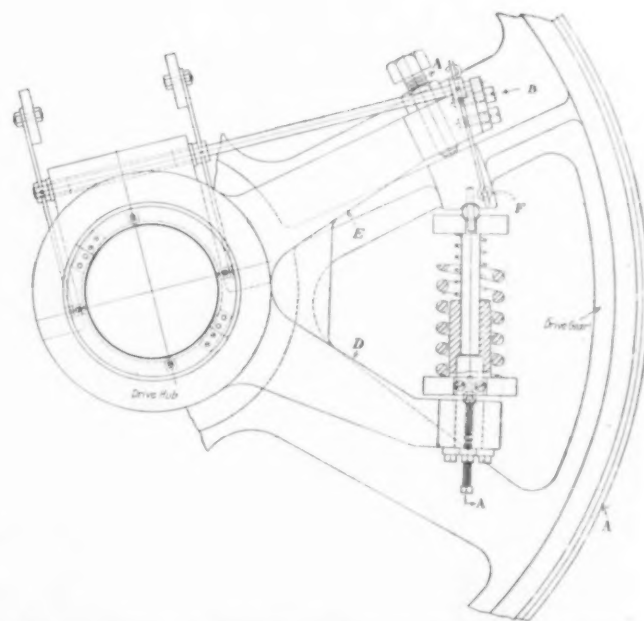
PORTION OF DRIVE GEAR, SHOWING METHOD OF MOUNTING THE COMPRESSION SPRINGS
